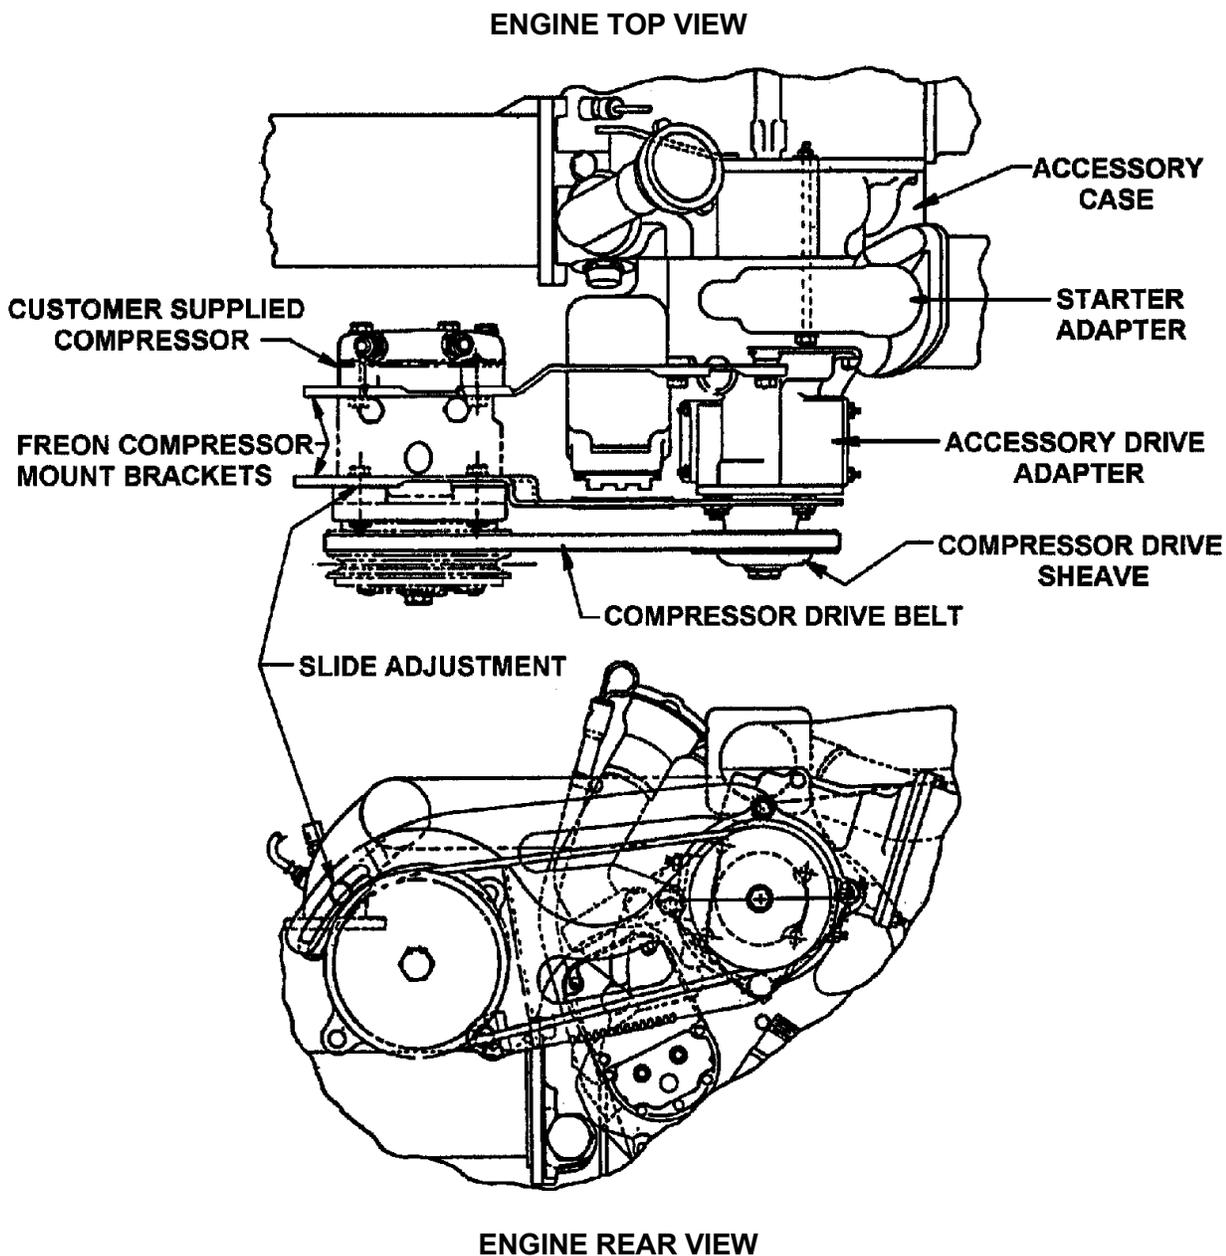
COMPRESSOR DRIVE (TSIO-360-RB)
